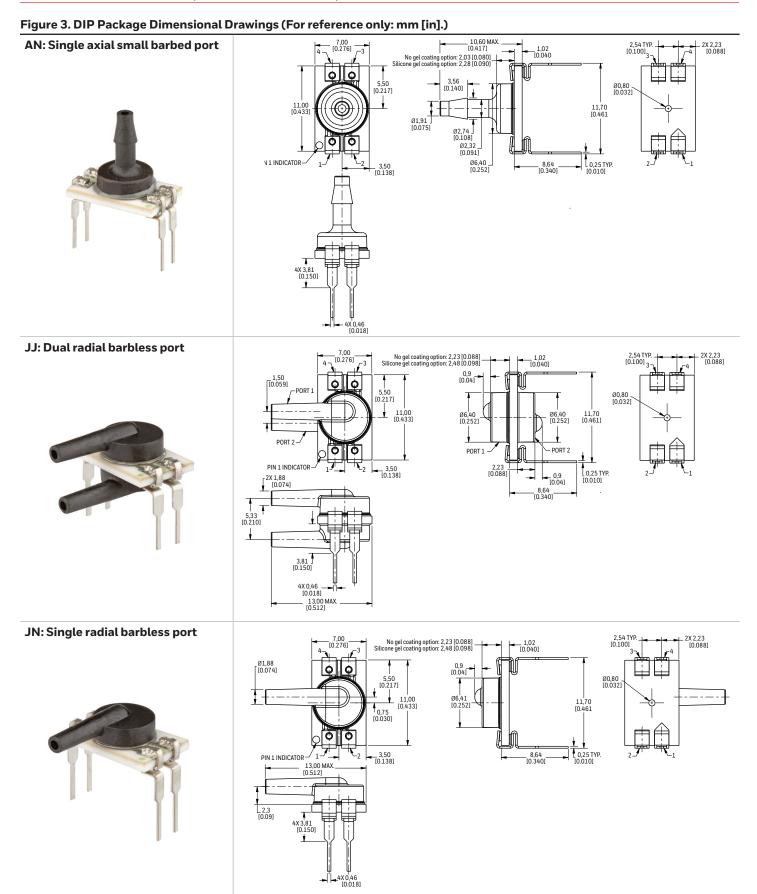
DIP Package Dimensional Drawings (For reference only: mm [in], continued.)
